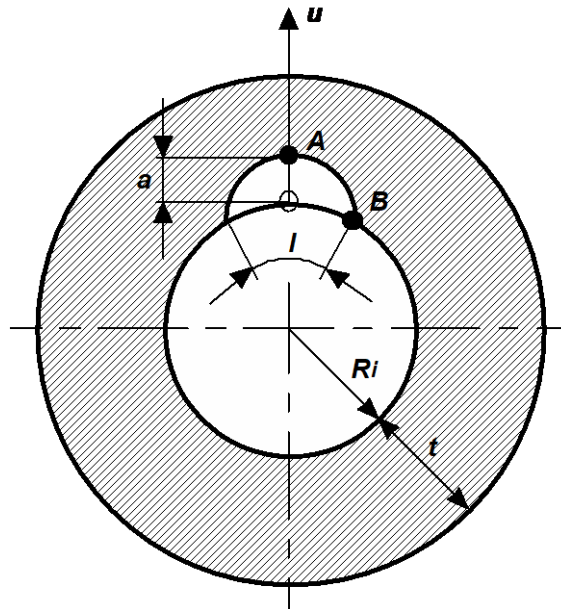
Part circumferential internal surface crack in a cylinder.
